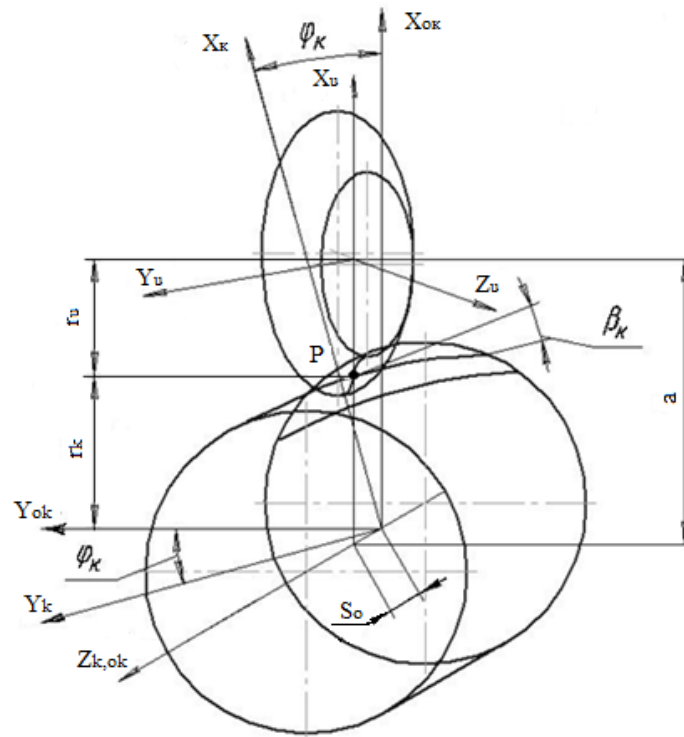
Geometrical-kinematic diagram of the product tooth profile shaping by the tool
